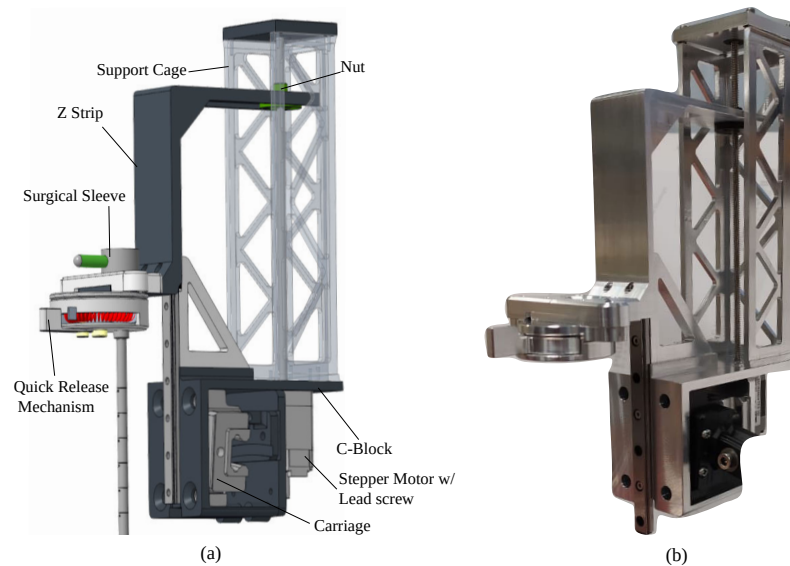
Translation mechanism (a) CAD model (b) Actual mechanism
